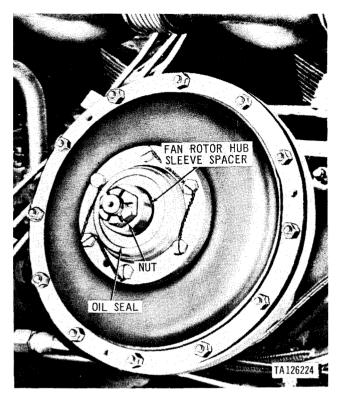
Fan drive housing fan rotor hub sleeve spacer installed for leakage test.
